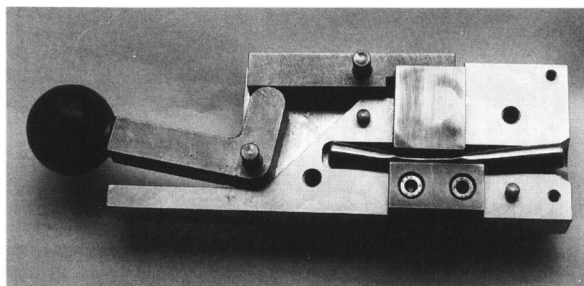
Cross-section through the lever press with "squeezed" platinum ampoule.
